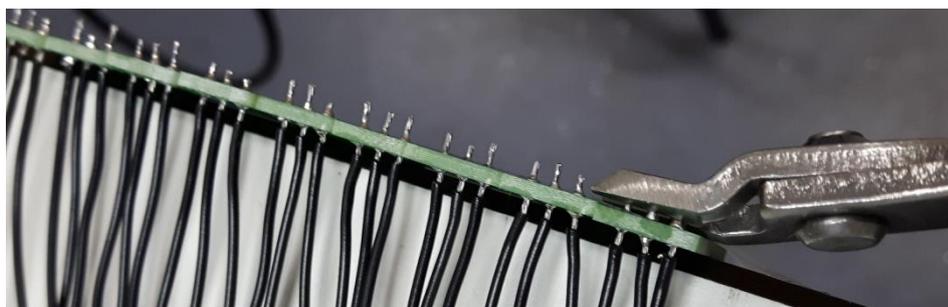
The protruding sharp ends of the soldered wires were cut off even with a nipper.
